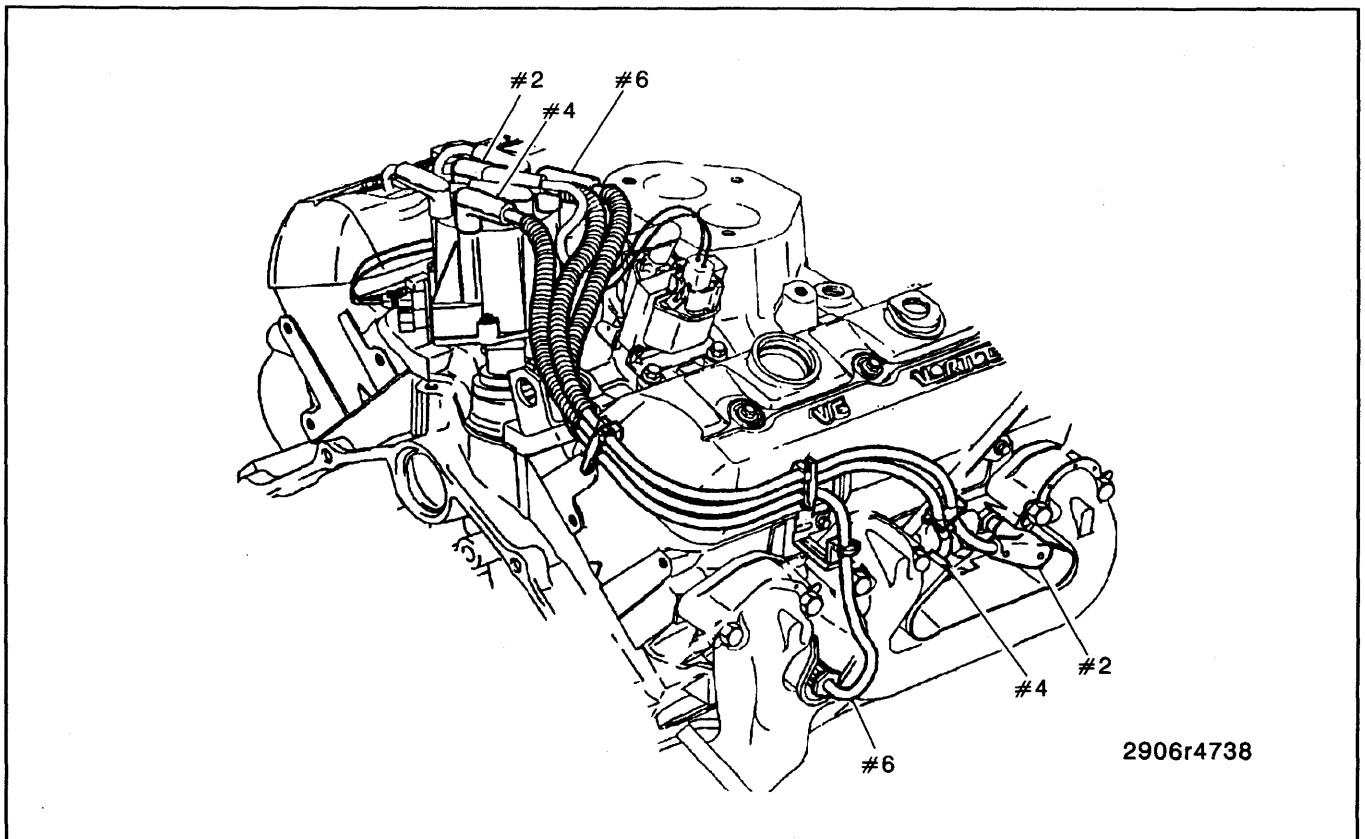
Spark Plug Wire Routing - Right Side (4.3L VIN Z)
